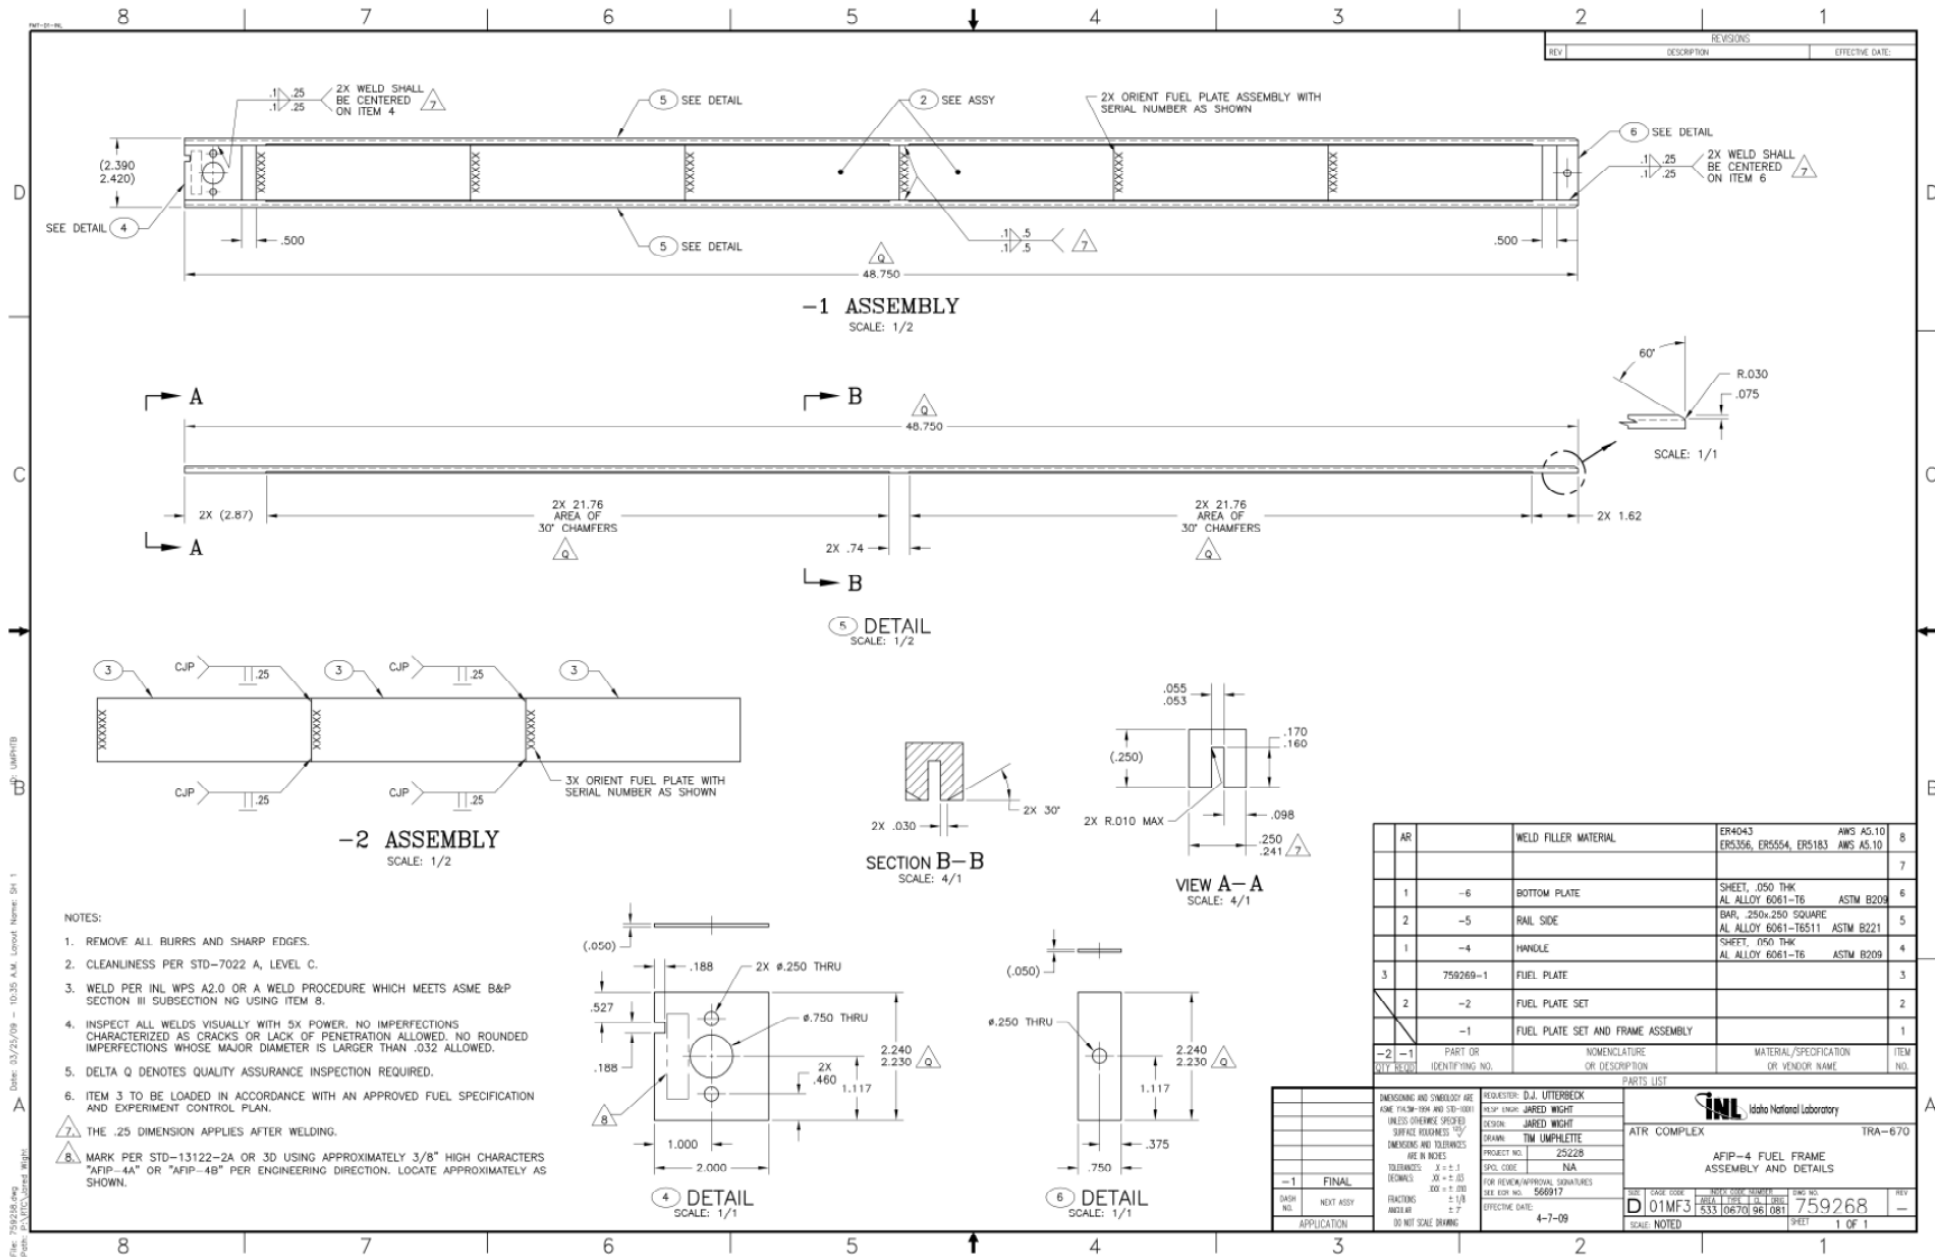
DWG-759268 REV 0 AFIP-4 Frame Assembly.
